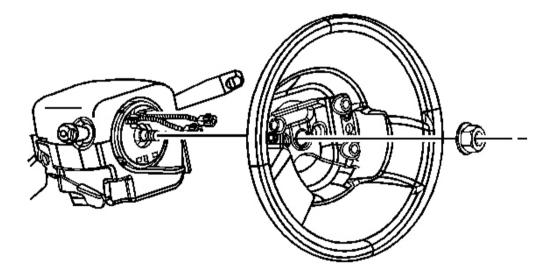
Steering Wheel & Nut Courtesy of GENERAL MOTORS CORP.
